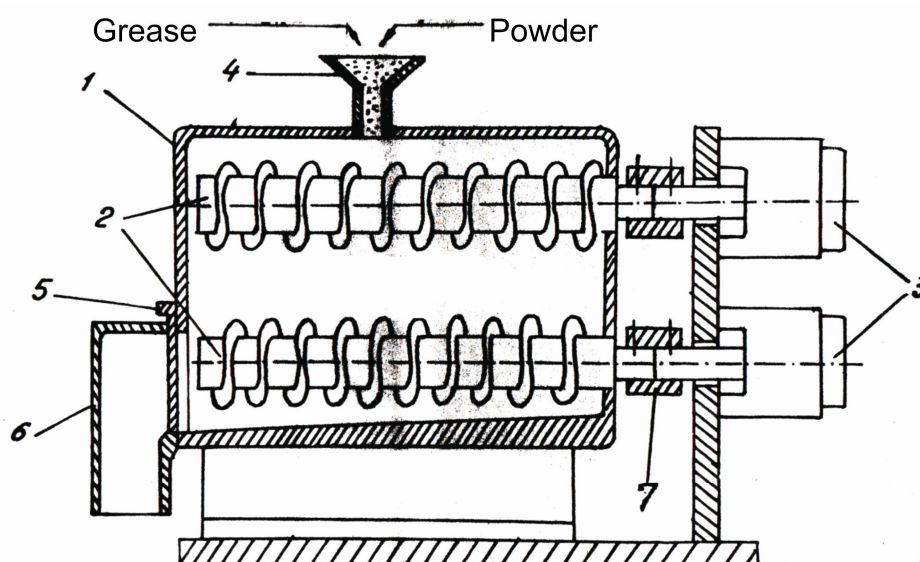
Screw mixer: 1 – camera; 2 – blade; 3 – motor; 4 – bunker; 5 – a cover; 6 – bunker; 7 – coupling
